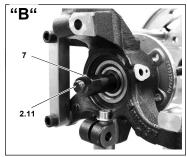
Screw hydraulic cylinder into base plate. Screw on clamping nut.
